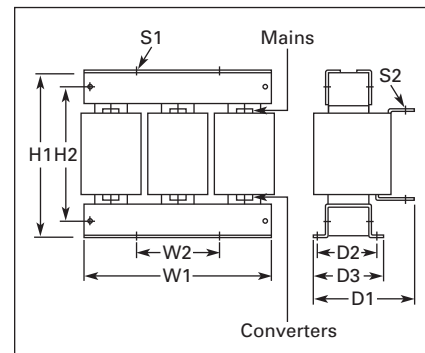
Line Reactor Dimensions for LCX9000 Drives Sizes larger than 61A
